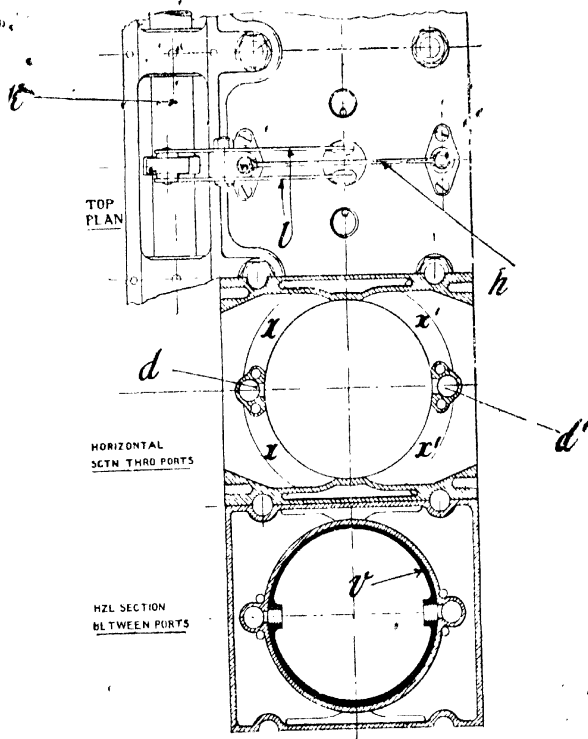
A. — Plan views of four-cylinder motor fitted with the Howard sleeve valve.
